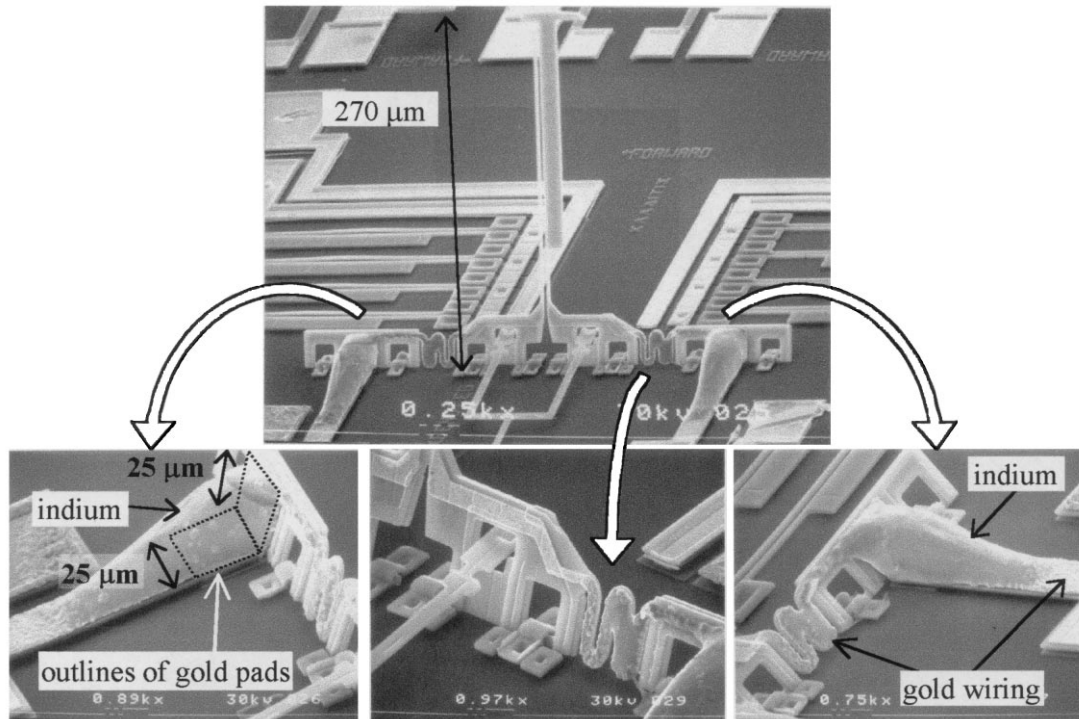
SEM of a single solder self-assembled microrobot leg showing close views of the left and right indium solder joints and the electro-mechanical linkage isolating the right solder joint from the leg.
